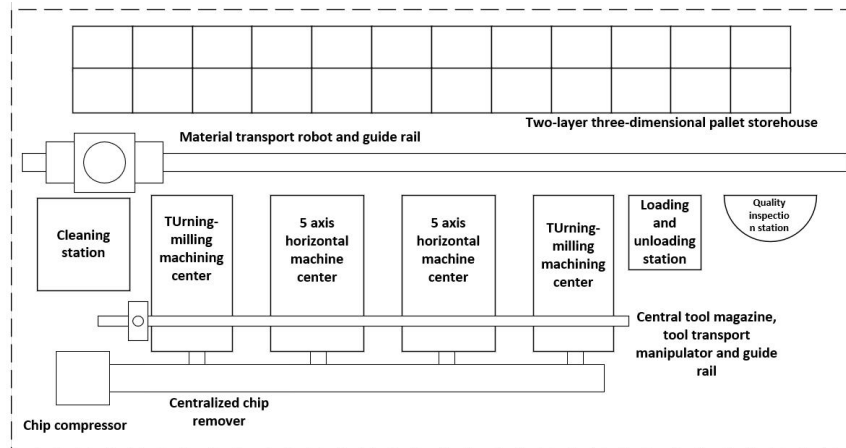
Layout of flexible manufacturing cell for aluminum magnesium casing
